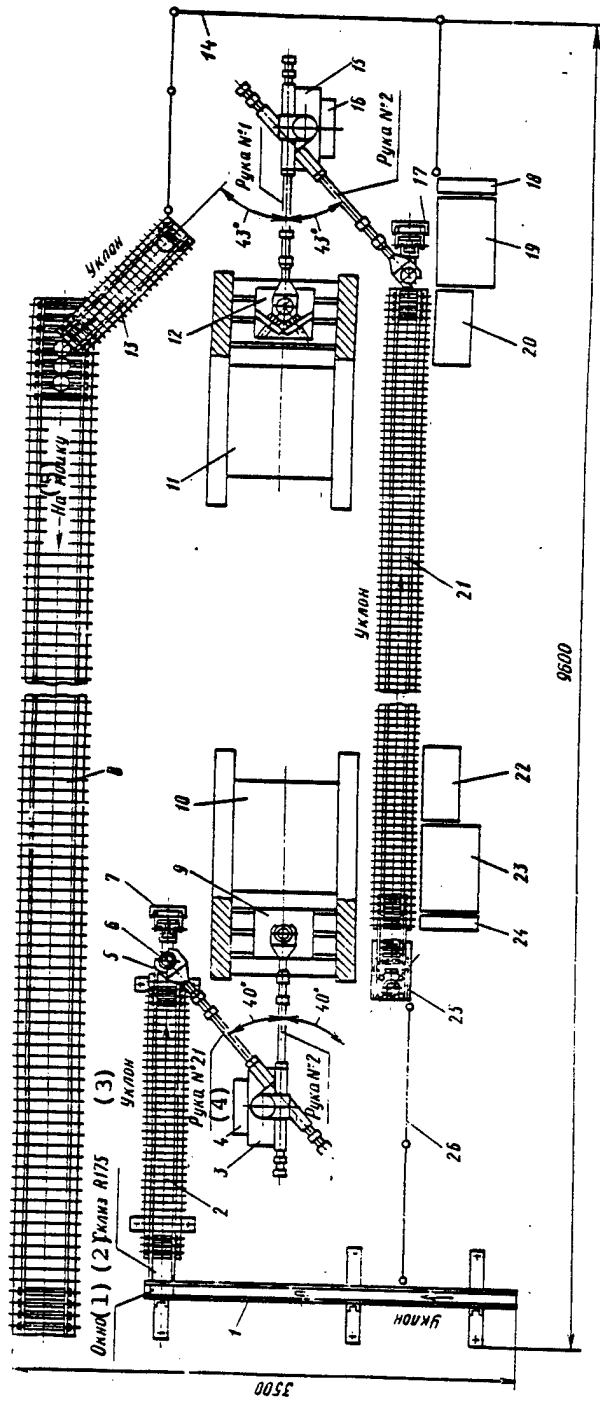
Automatic Line for Die-Forging Housing: 1--inclined chute; 2, 13, 21--inclined roller conveyor; 3, 15--PRP-5 robot; 4, 16--robot pneumatic control unit; 7, 17--intermediate table with blank piece delivery unit; 8--drive roller conveyor; 9--reducing die; 10, 11--KD2328 press; 12--piercing die; 14, 26--enclosure with door interlocked with robot electric circuit; 18, 24--matching module; 19, 23-- UTM-30 control unit; 20, 22--electric cabinet of press; 25--tilting mechanism
